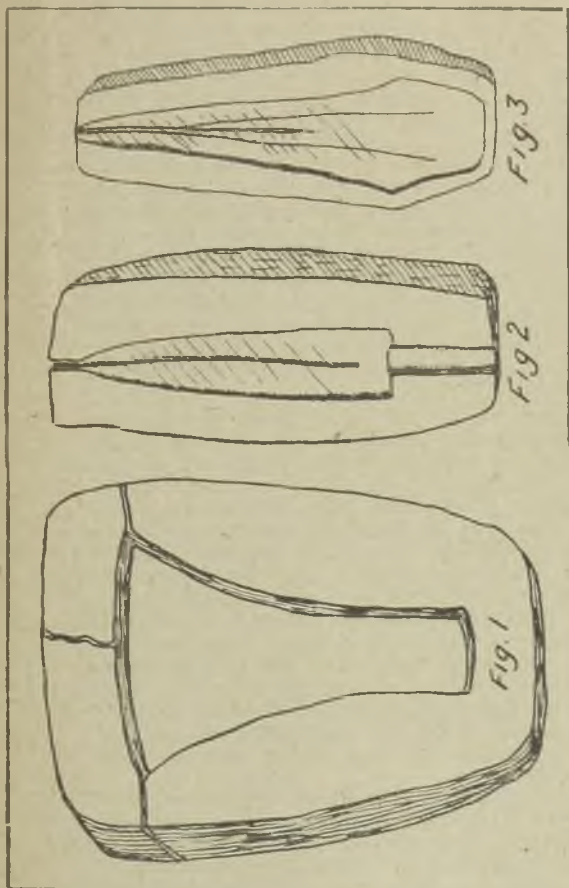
OPEN STONE MOULD FOR CASTING A BELT. (*Johnson.*)
